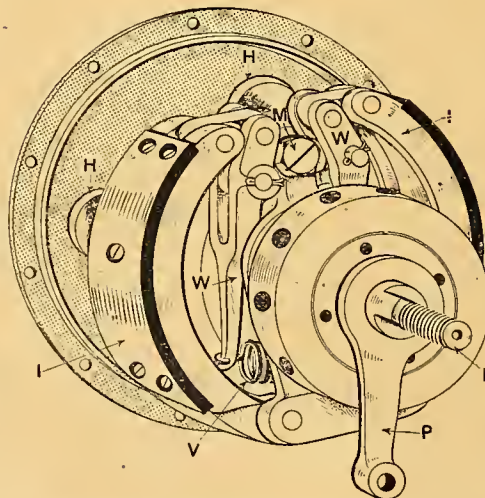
The gear removed from the hub shell showing clutch operating mechanism and drum for belt rim.
